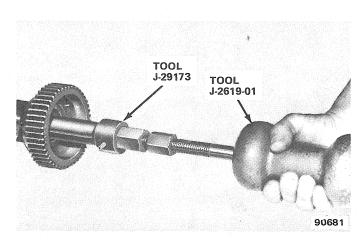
D-33 Mainshaft Pilot Bearing Removal
